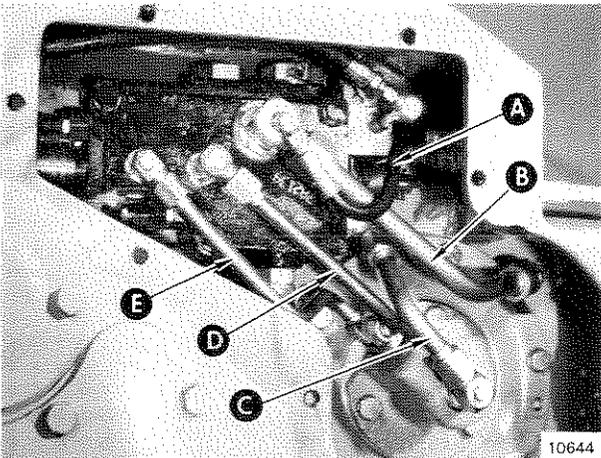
ARRANGEMENT OF COMPONENTS, BRAKE AND CLUTCH SHAFT
